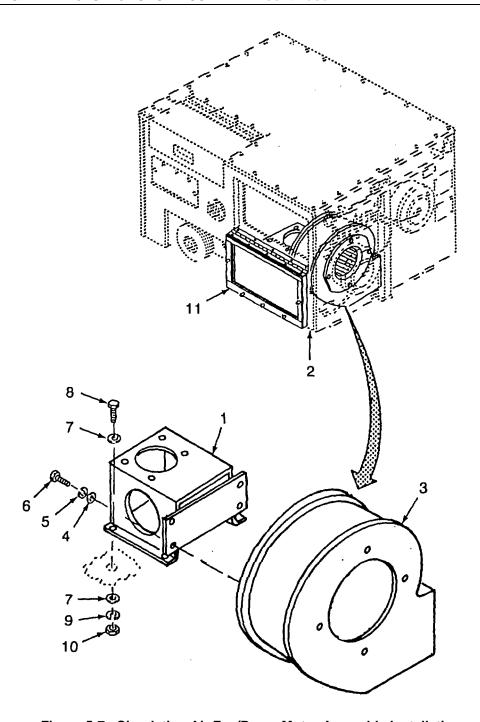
Circulating Air Fan/Pump Motor Assembly Installation
